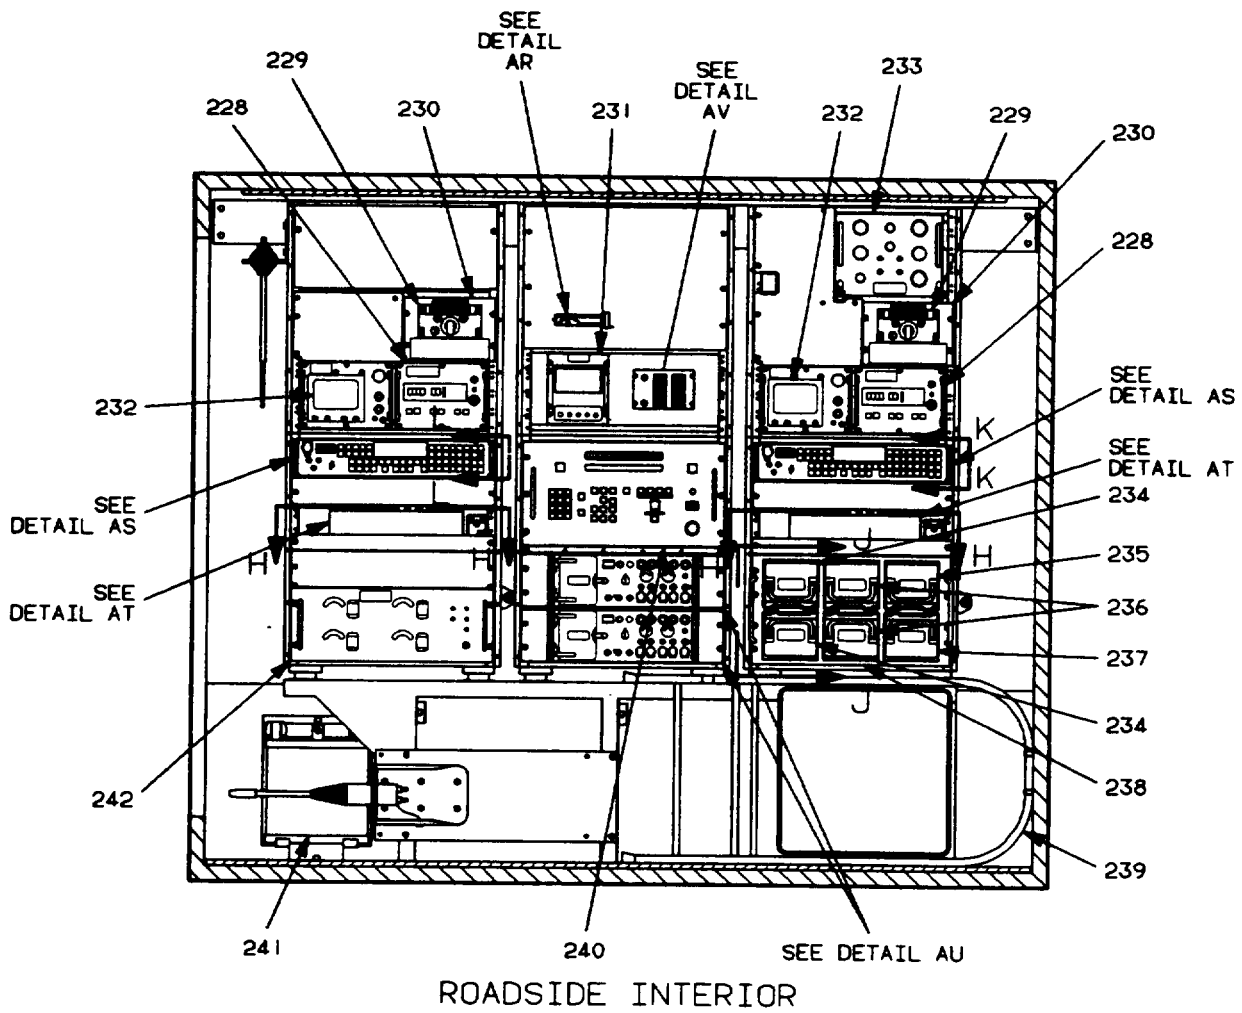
SHELTER ASSEMBLY (SHEET 19 OF 24)
